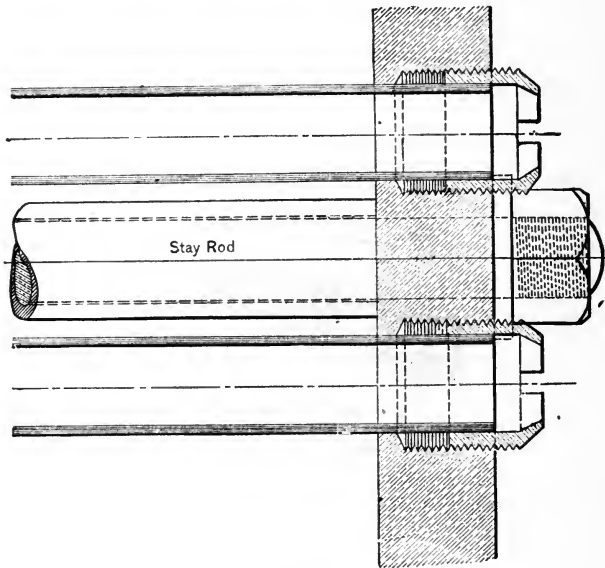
Ferrule and Tube Packing, Surface Condenser.
